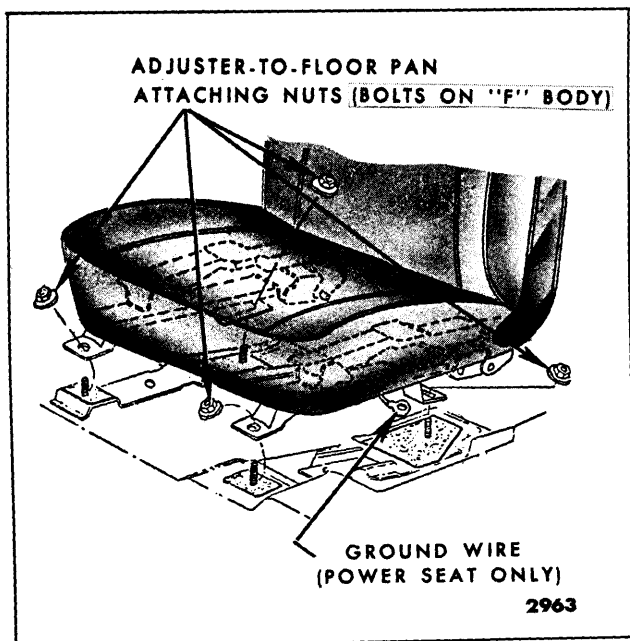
Bucket Seat Floor Pan Attachment - "A, F, X & Z" Styles—Bucket Seat
